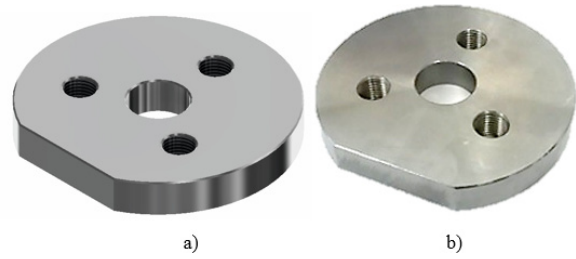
The sample intended for the experiment: a) CAD model, b) manufactured sample
